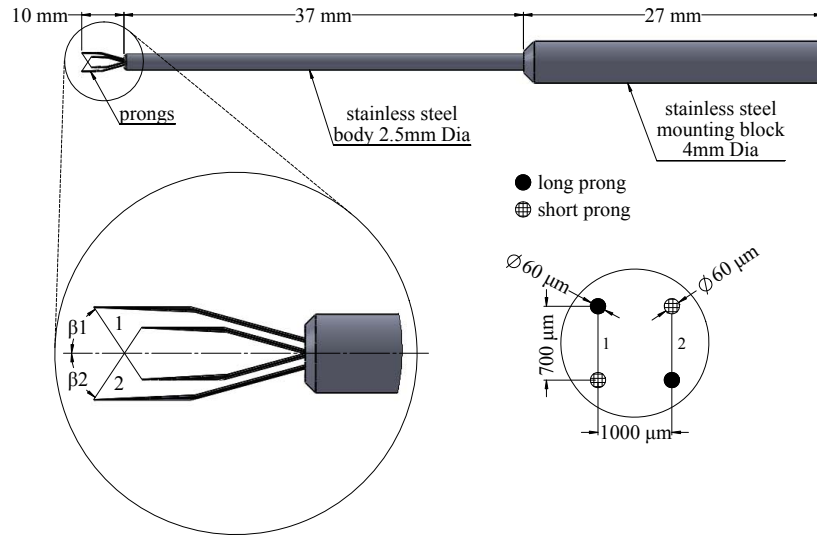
Sketch of the straight cross-wire probe. Dimensions are in mm.
